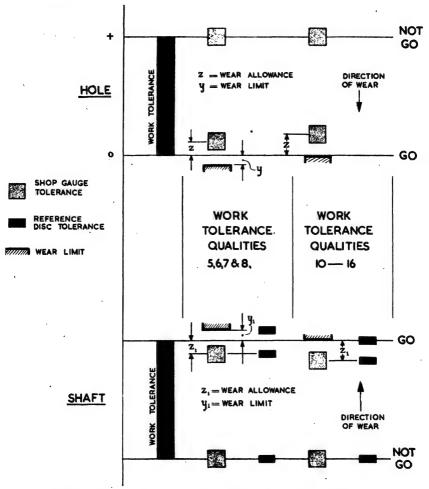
Disposition of I.S.A. LIMIT GAUGE TOLERANCES (up to 180 mm)
